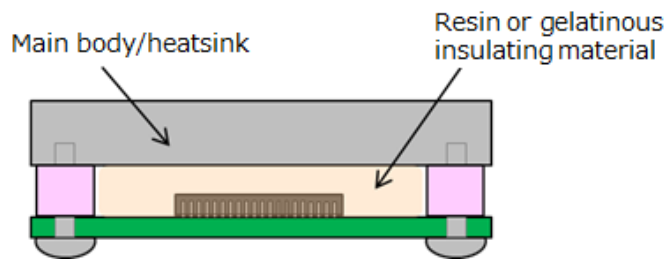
Heatsink attachment example (using resin or gelatinous insulating material)
